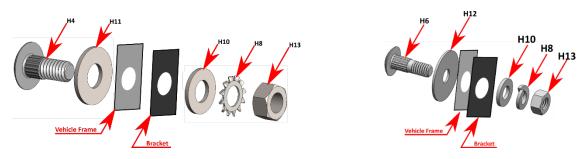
RAPTOR-310 Hardware Stacking Order - Frontmost Hole (Left), Rearmost Hole (Right)
